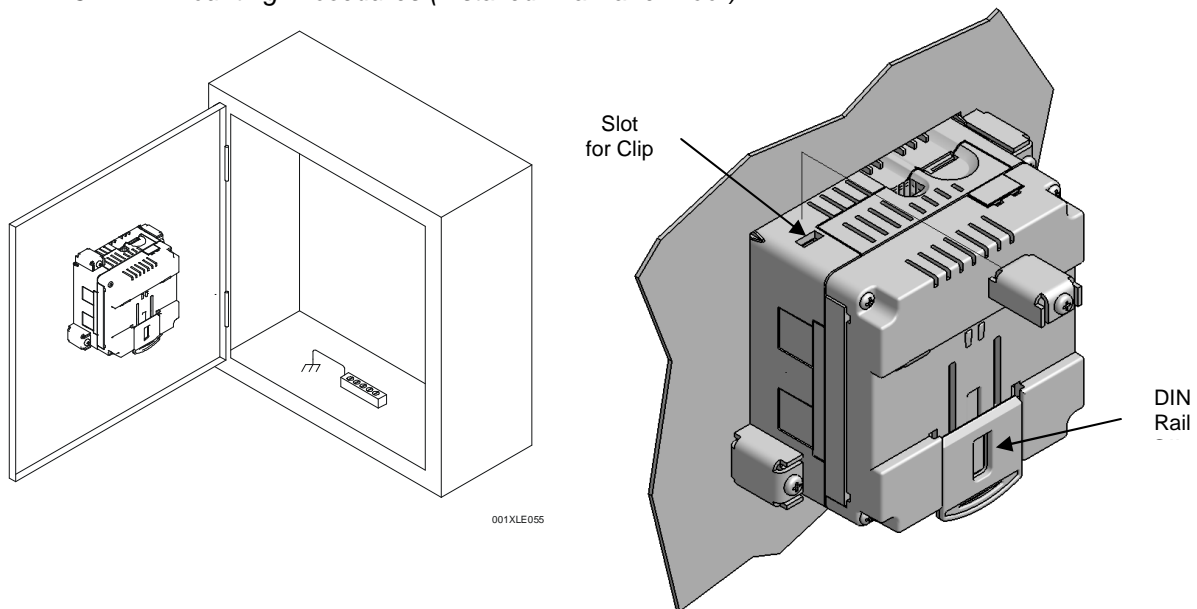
Panel Mounting of the SmartMQn Motor and Close-up View of Back
